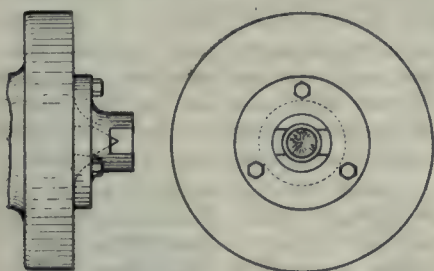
DRIVER FOR TURNING SHELL BOLTED TO FACEPLATE.
